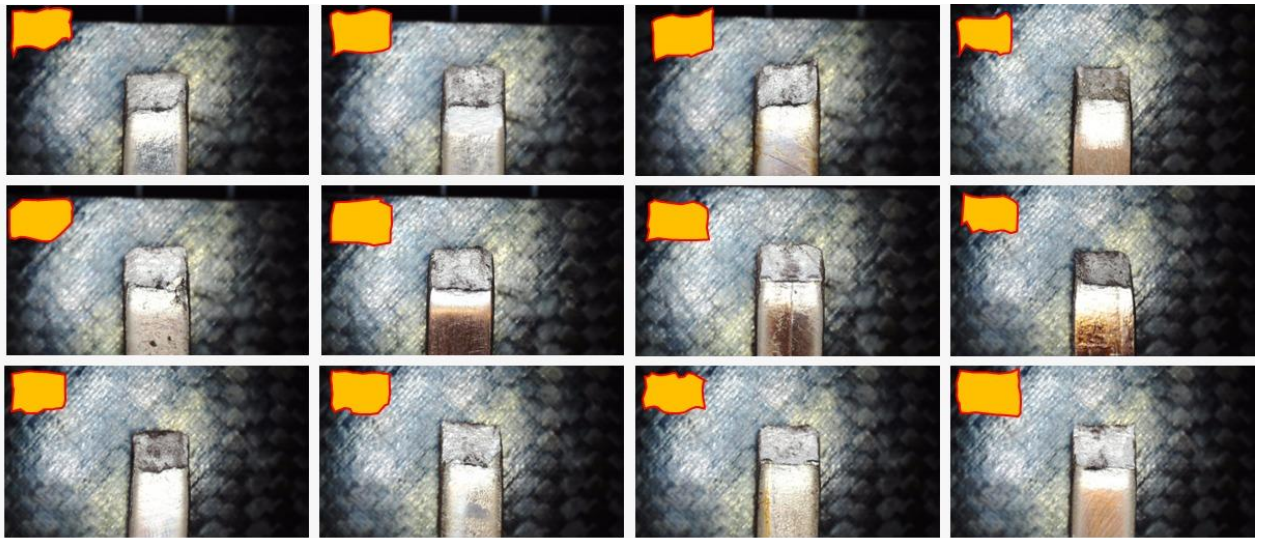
15: Top Views of Fracture Surfaces.
